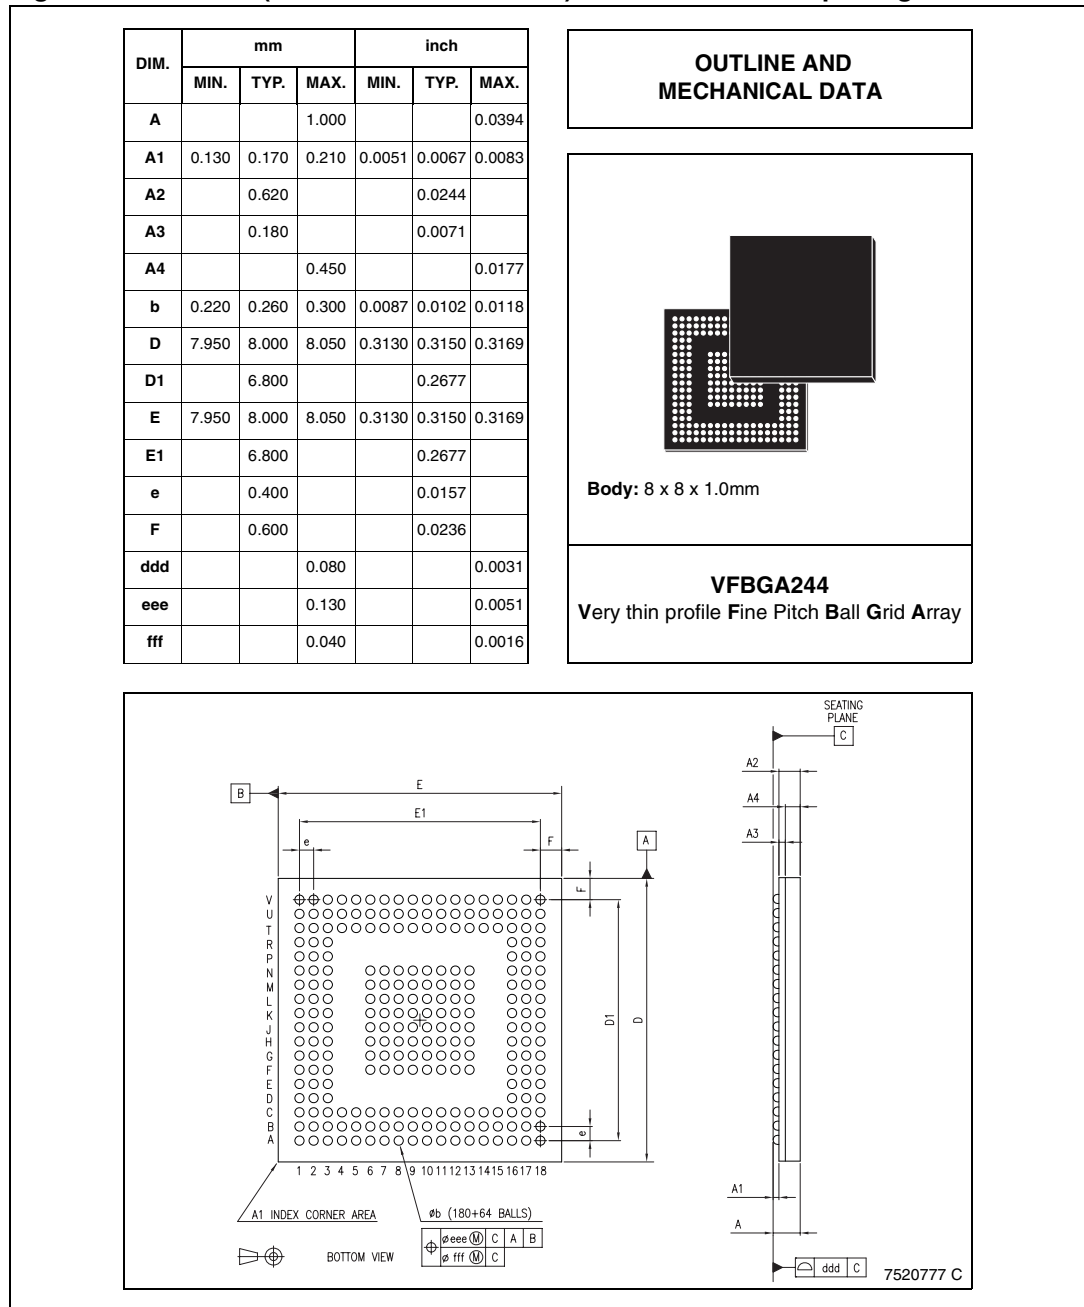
VFBGA (8x8x1.0mm 180+64 ball) mechanical data & package dimensions
